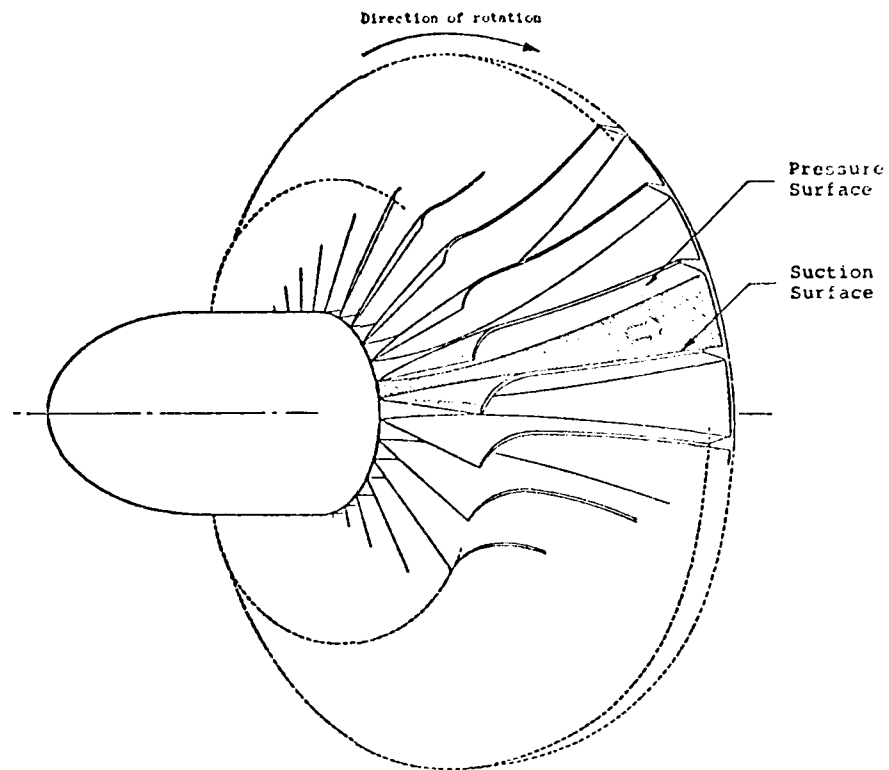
Passage between blades in impeller of typical centrifugal compressor
